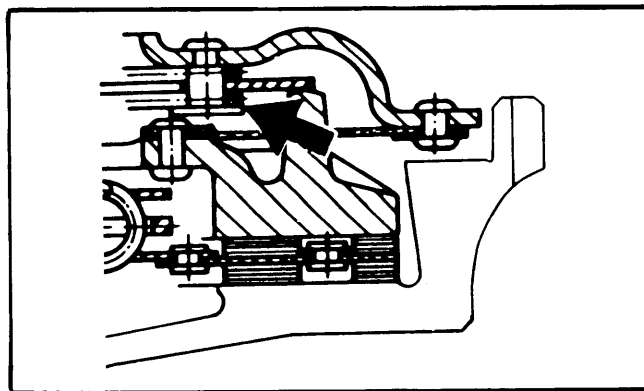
View Showing Lubrication Point on Diaphragm Spring
